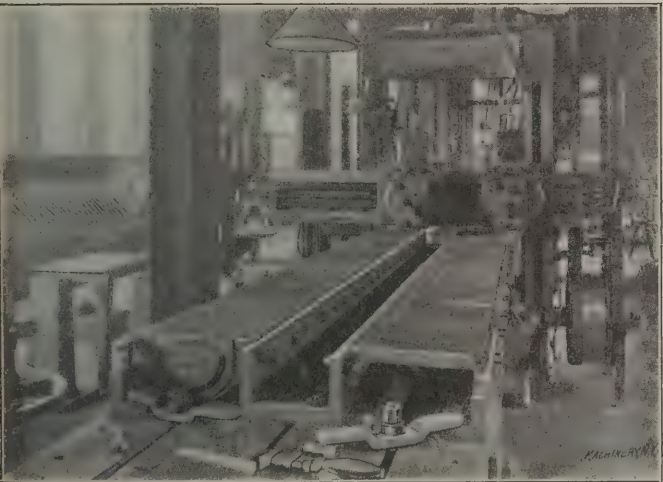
Fixture for Planing Castings shown in Fig. 4.
